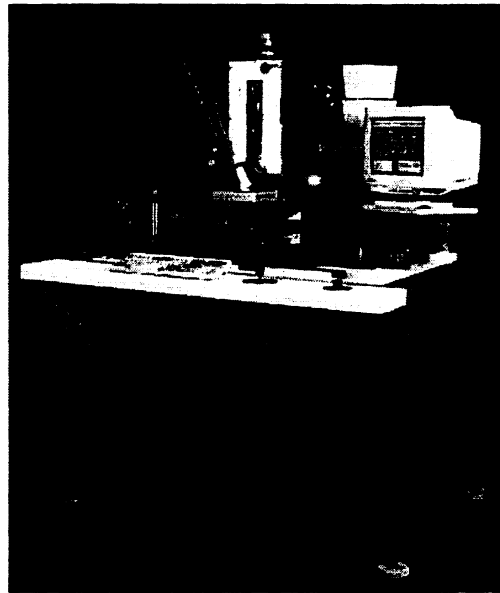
The SEC model 410 aligns and attached the flip chip die onto the machine.
